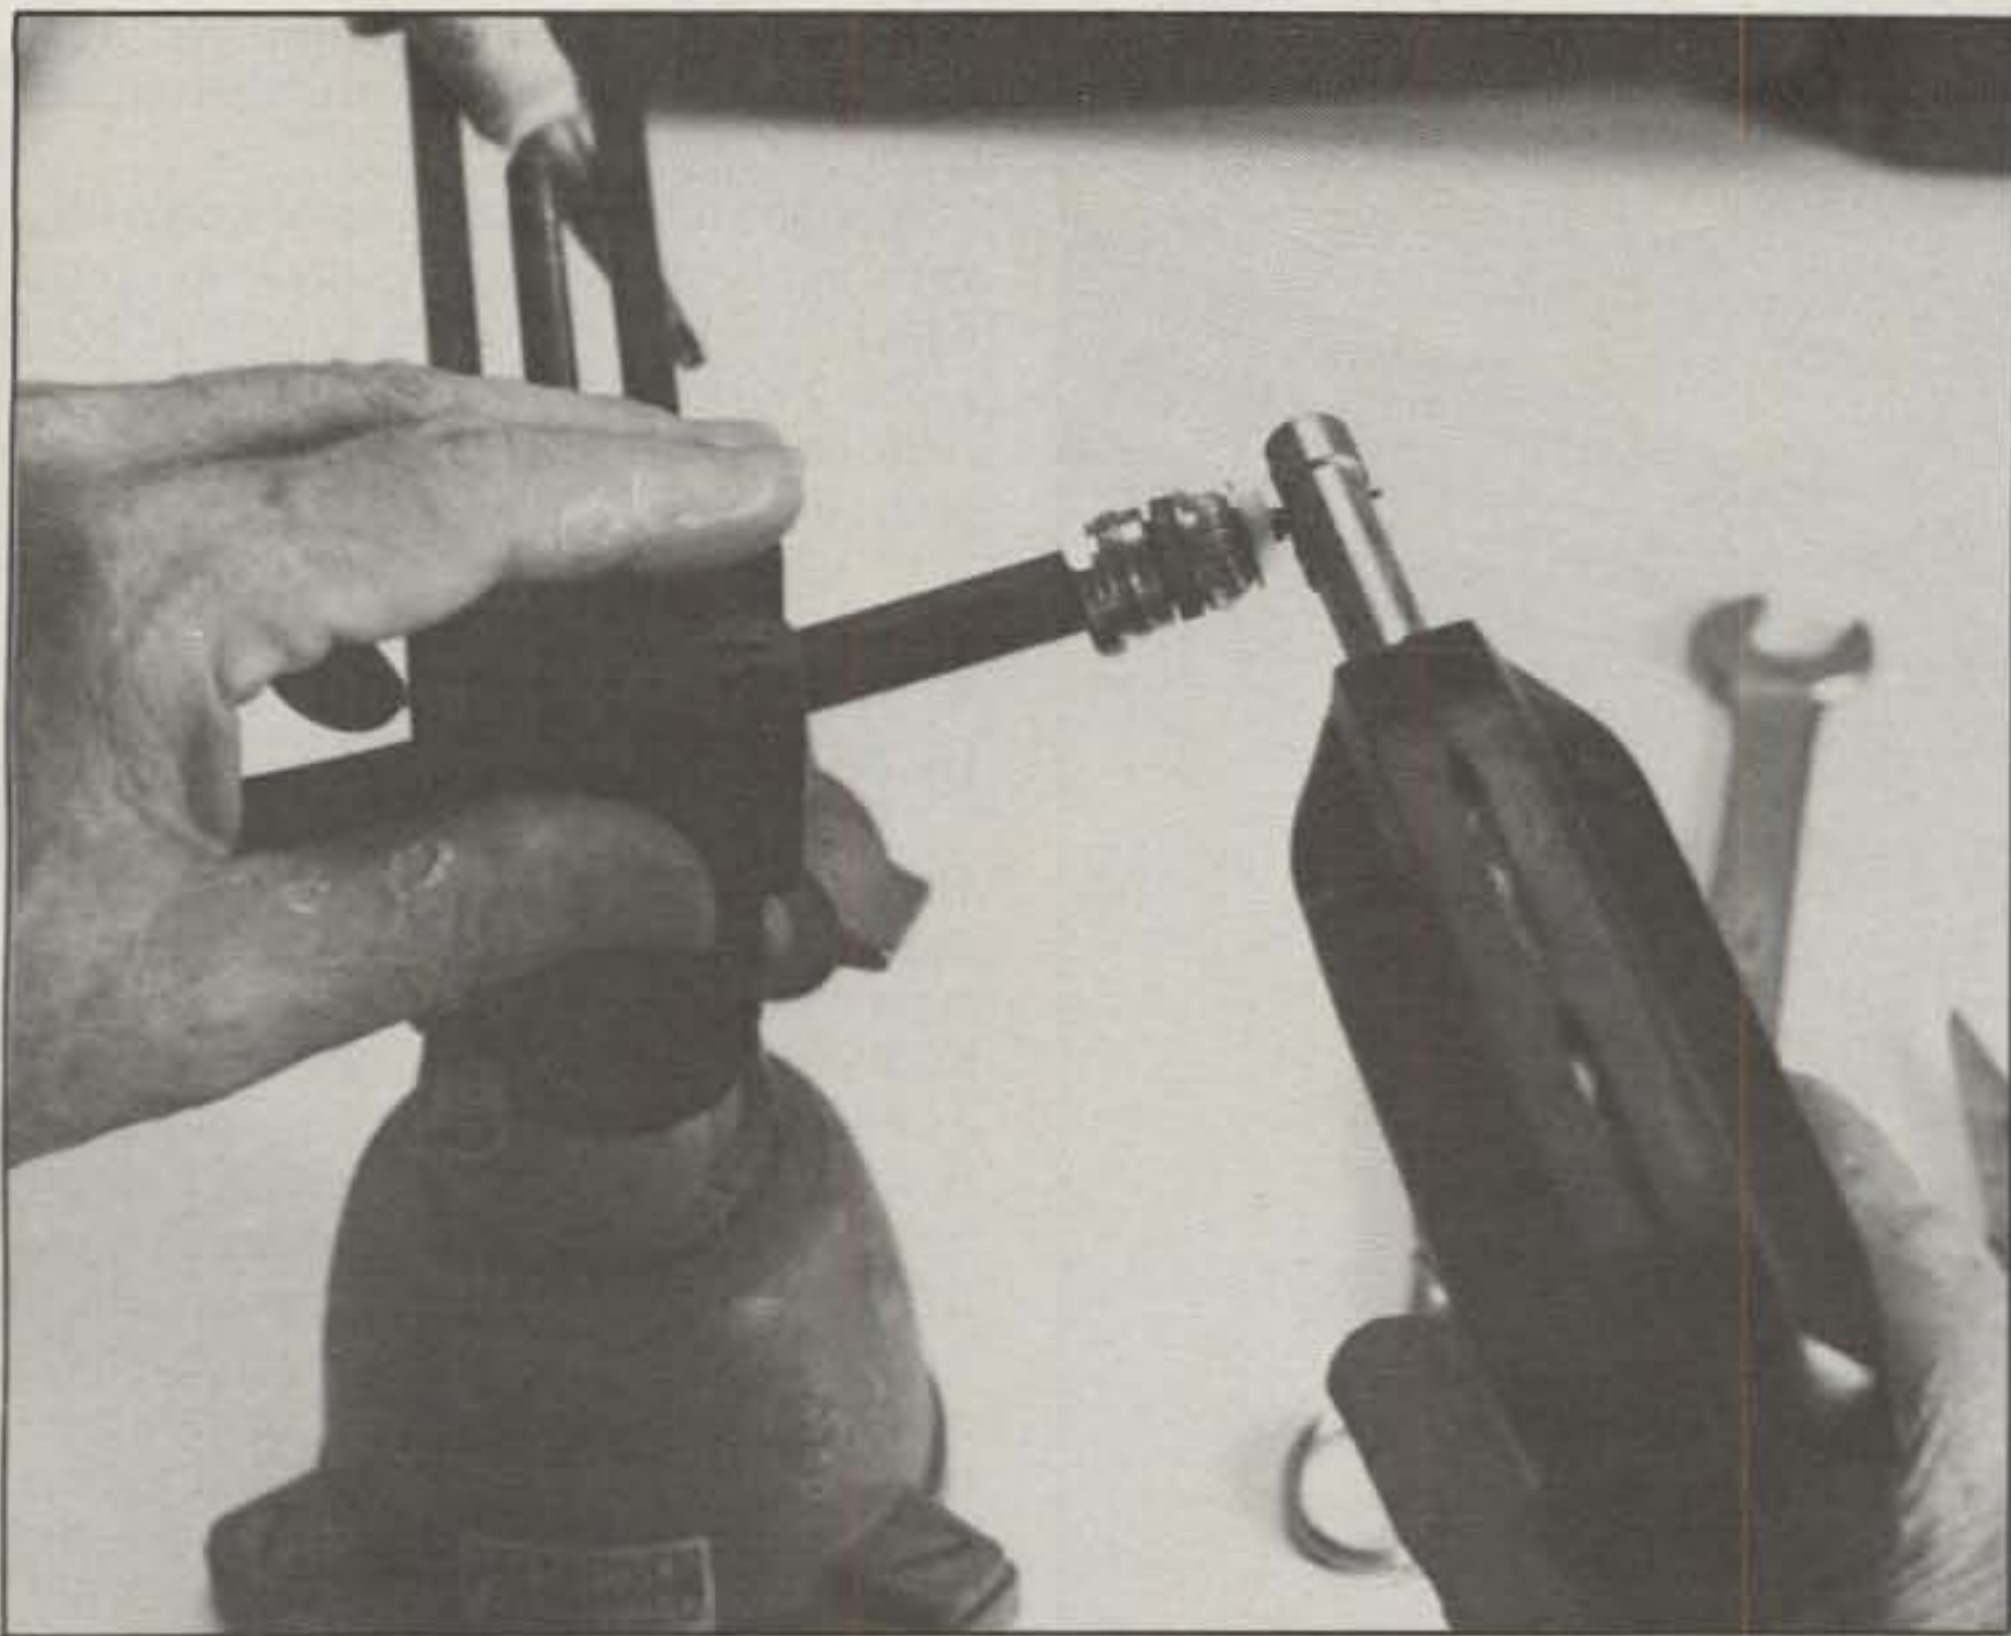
Apply center pin and solder. Use a soldering gun with the copper tip removed.
